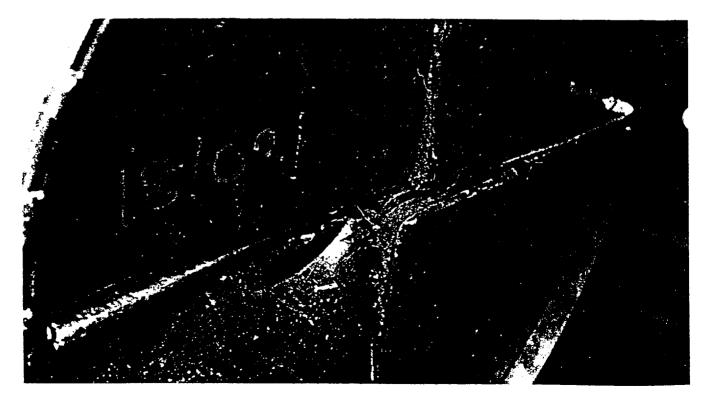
1863/10 - Damage to assembly C after all mechanical tests - base view
